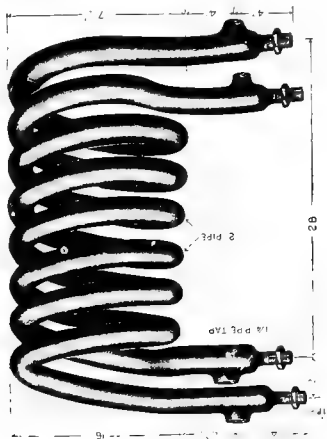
Gold's Duplex Coil with Welded Ends; 2 in., No. 608A.
